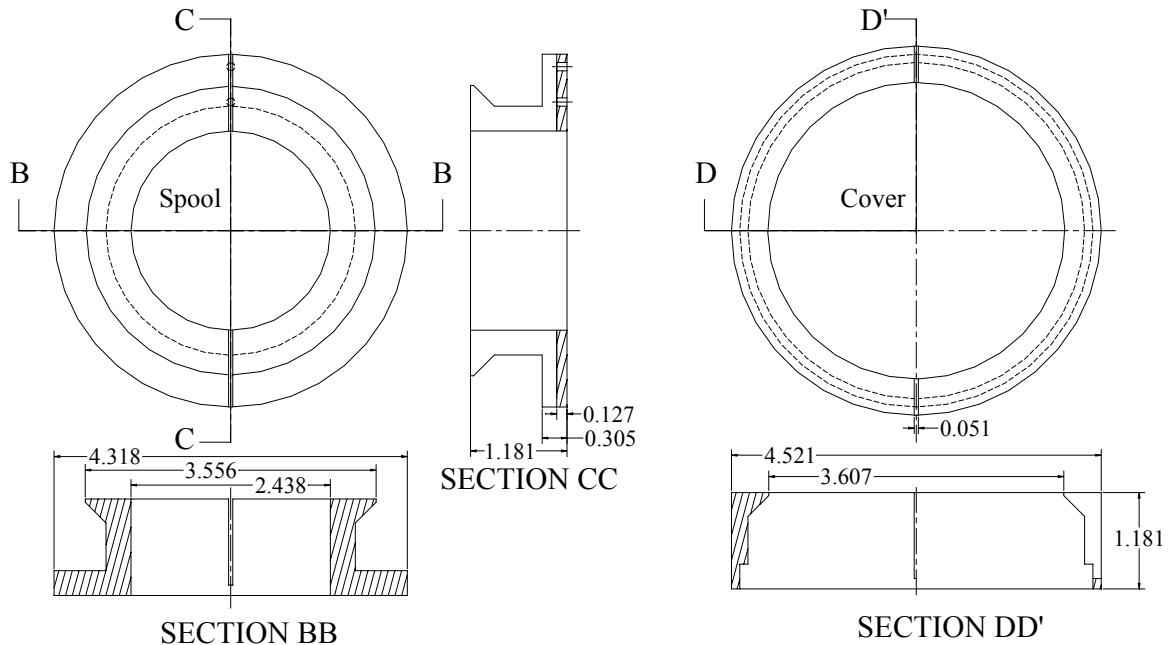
A technical drawing showing the two components of the valve yoke: the spool and the cover. The valve coil is wound onto the spool, and the cover is fit over the spool to create the valve yoke. All dimensions are in centimeters.
